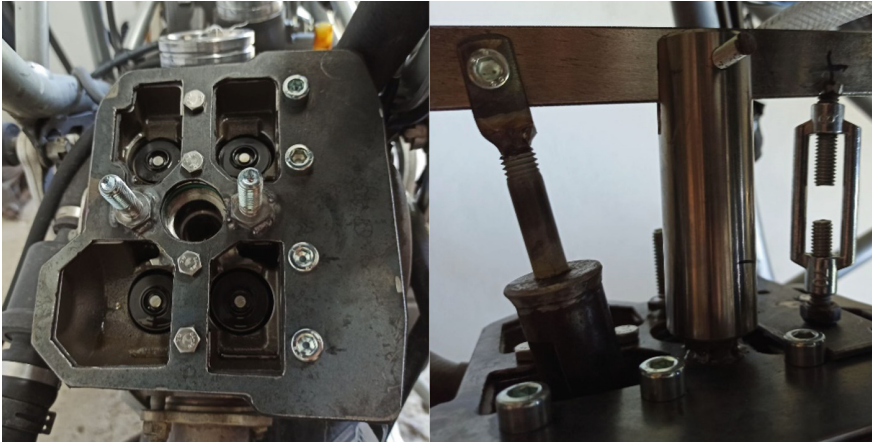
Valve spring compression base plate (left) and whole tool (right).
